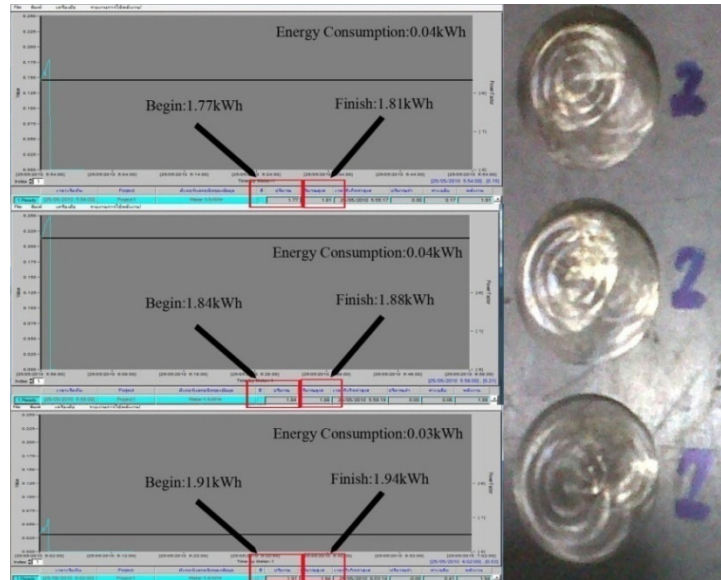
workpiece(2) under the conditions: 4166rpm;1666.4mm/min; 1mm
